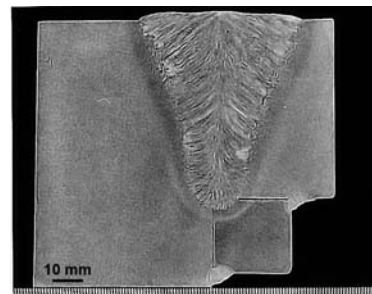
Cross sectional macrostructure of a corner joint weld of a box column tandem-submerged-arc welded with a flux-wire combination of PFI-53ES/US-36L.
